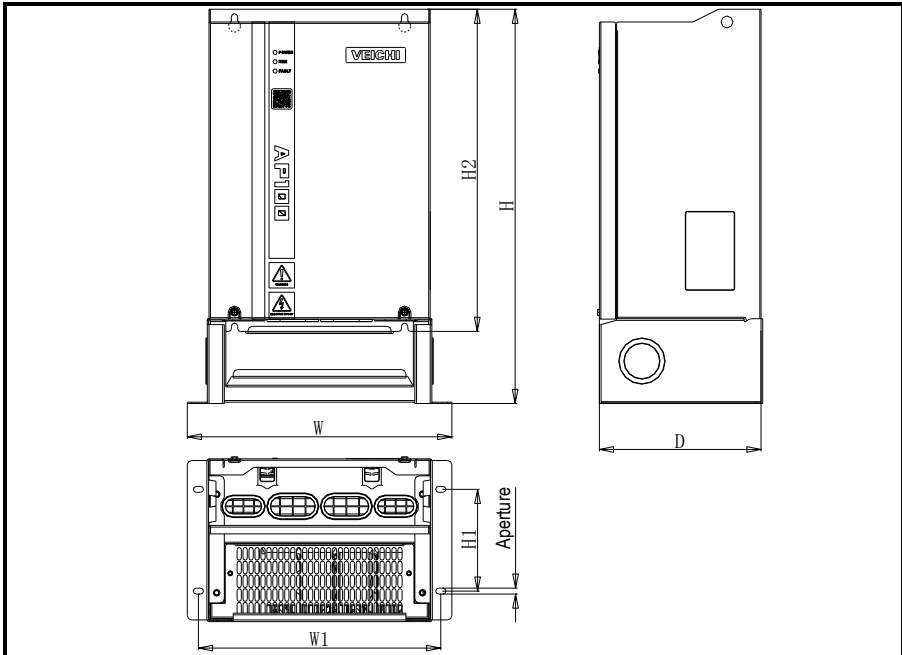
Drawing of the shape and installation dimensions of the vertical cabinet
